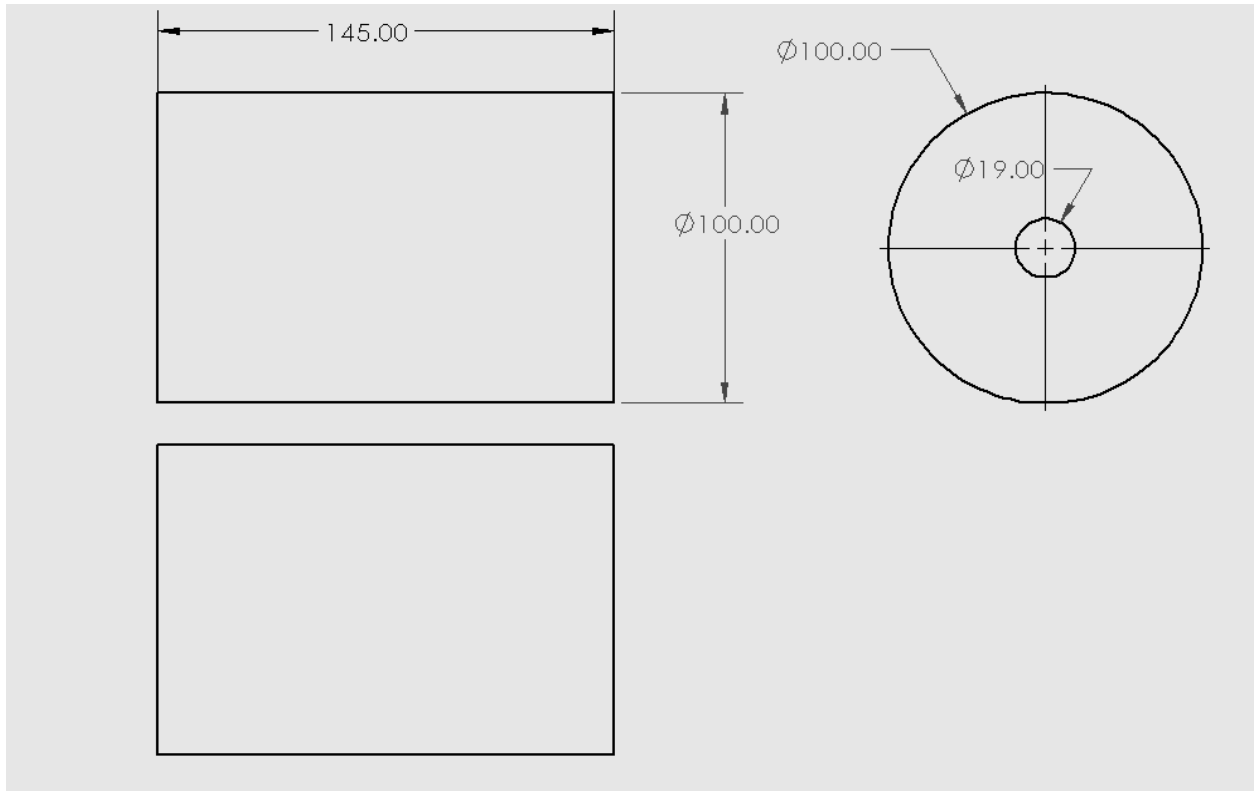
Drawing of drum to mount on an aluminum shaft (Scale: 1:1, unit: mm).
